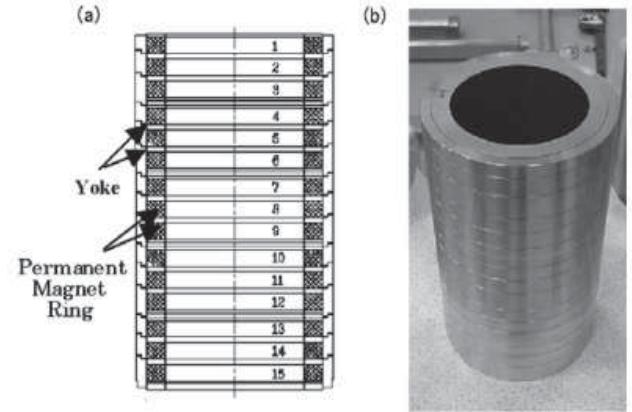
a) Section view of the SMB outer rotor, stacked with layers of axially magnetized permanent magnets b) A fully assembled NEDO SMB outer rotor [62].
